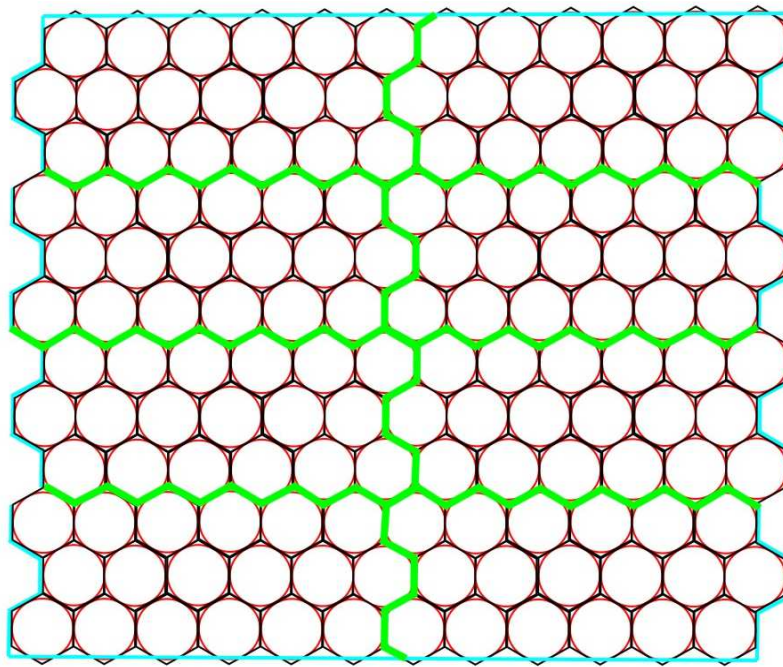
Example of the sheet parting at shape cutting with working strips indication
